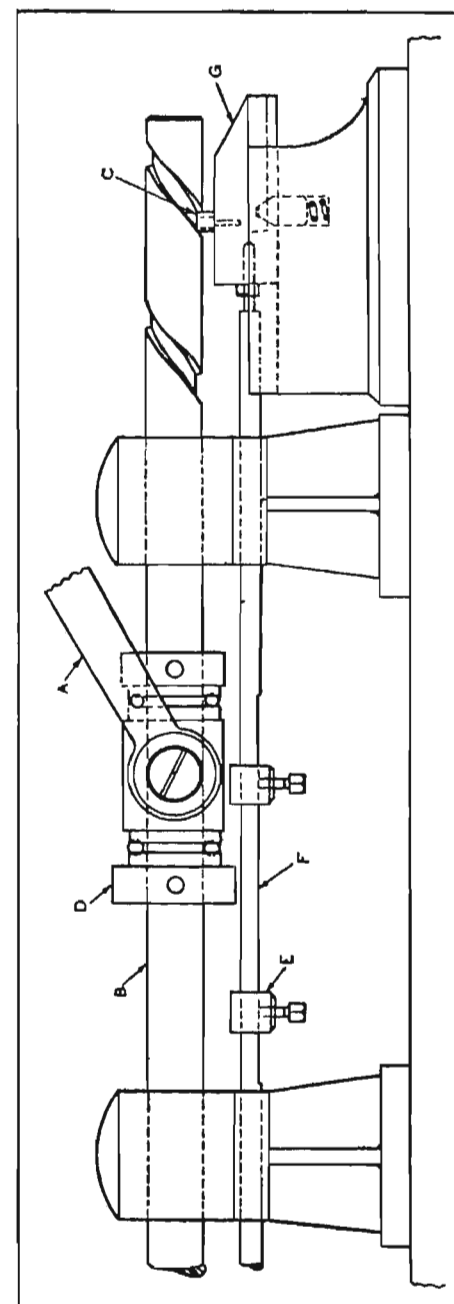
Mechanism for Obtaining Combined Reciprocating and Rotating Motion.
